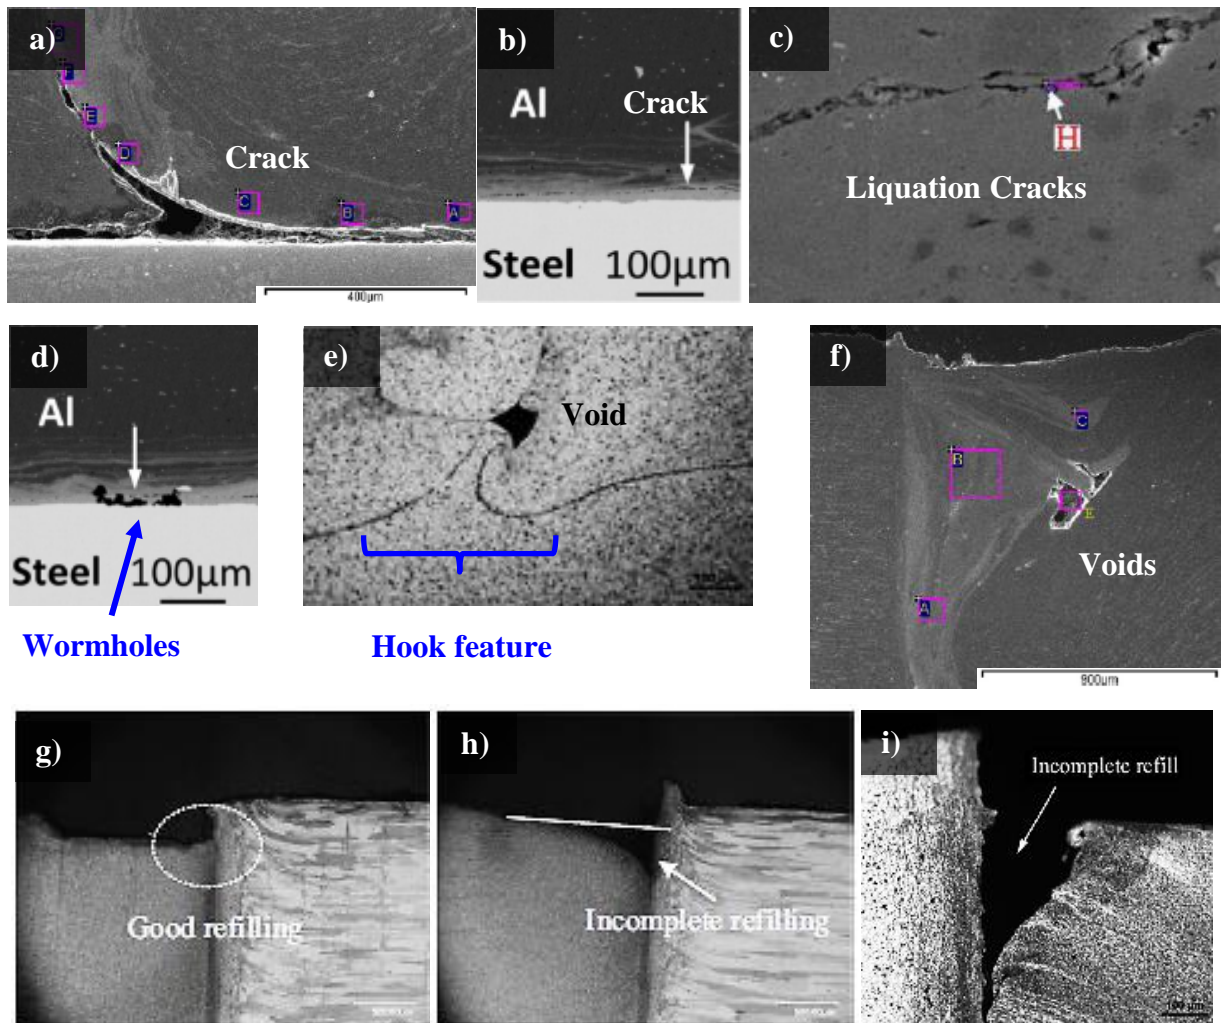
a) Crack at the interface near the sleeve path, in dissimilar welding of Mg-steel (Shen, Ding, et al. 2016). b) Crack near the interface in dissimilar welding of Al-steel (Dong et al. 2016). c) Liquefaction cracks in similar welding of 7075-T6 Al alloy (Shen et al. 2015). d) Wormholes in dissimilar welding of Al-steel (Dong et al. 2016). e) Void near hook feature (Shen, Yang, et al. 2014). f) Voids in dissimilar welding of Mg-steel in the SZ near the sleeve plunge path. g) Example of good joint refilling (Yue et al. 2017). Detail of incomplete refilling for h) 2198-T8 Al alloy (Yue et al. 2017) and i) 7075-T6 Al alloy (Shen et al. 2013).
